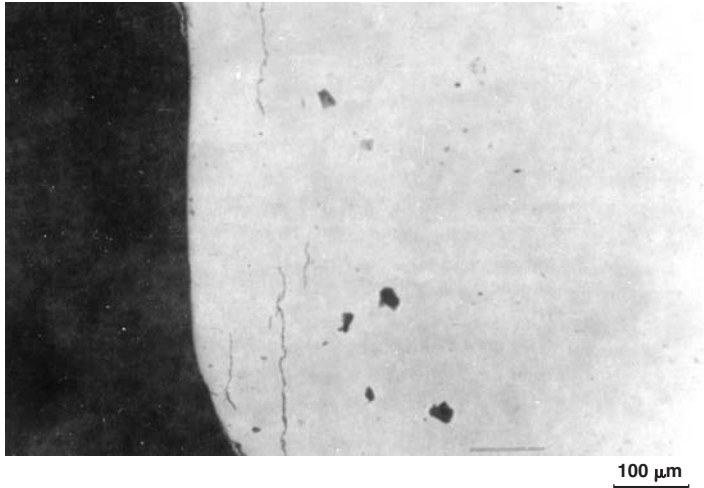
Cracks on the barrel surface of a failed bolt, close to the fracture surface, propagating in intercrystalline and transcrystalline modes
